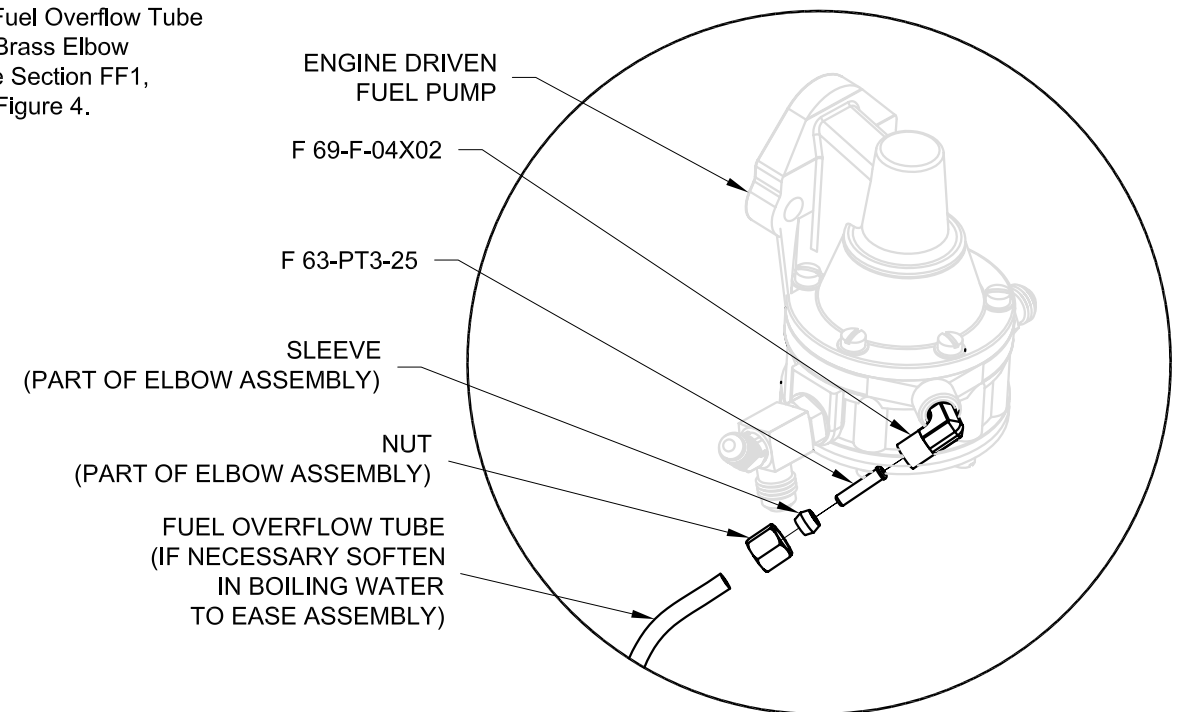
INSTALLING THE FUEL OVERFLOW TUBE
